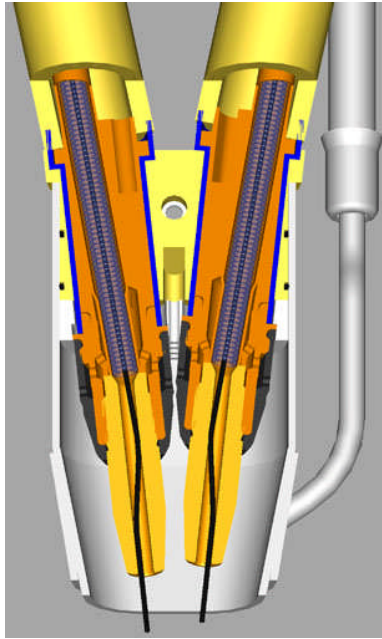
Typical Arrangement of a TGMAW Welding Torch Head (Pekkari, 2004)
